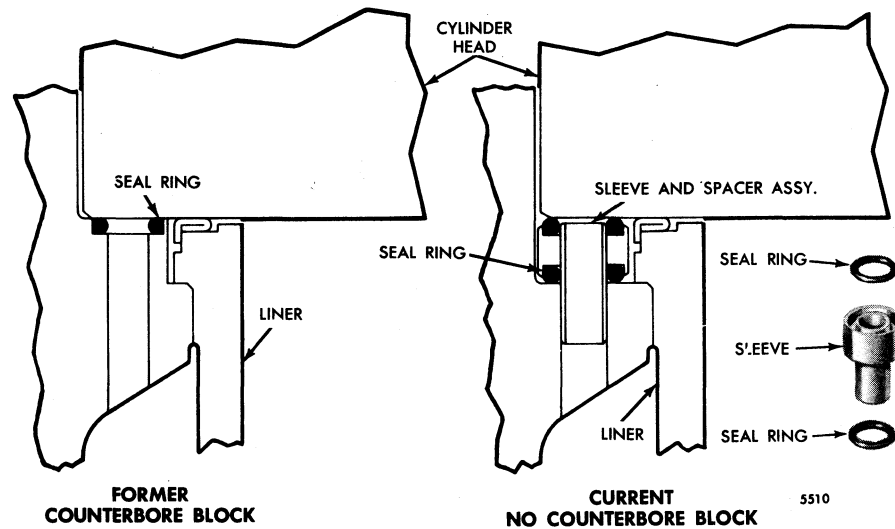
Former and Current Cylinder Block and Seal Rings
